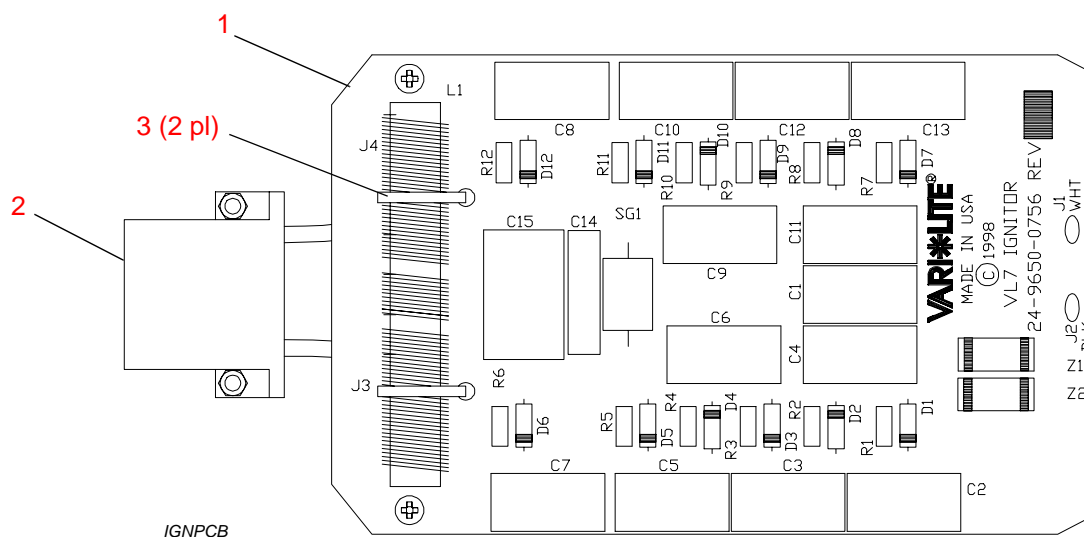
VL6B/VL6C Ignitor PCB Assembly
